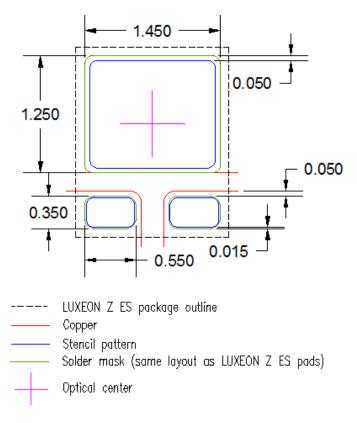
Layout design B. Recommended PCB footprint for LUXEON Z ES for high component count density based on solder mask defined pads. Dimensions in mm.
